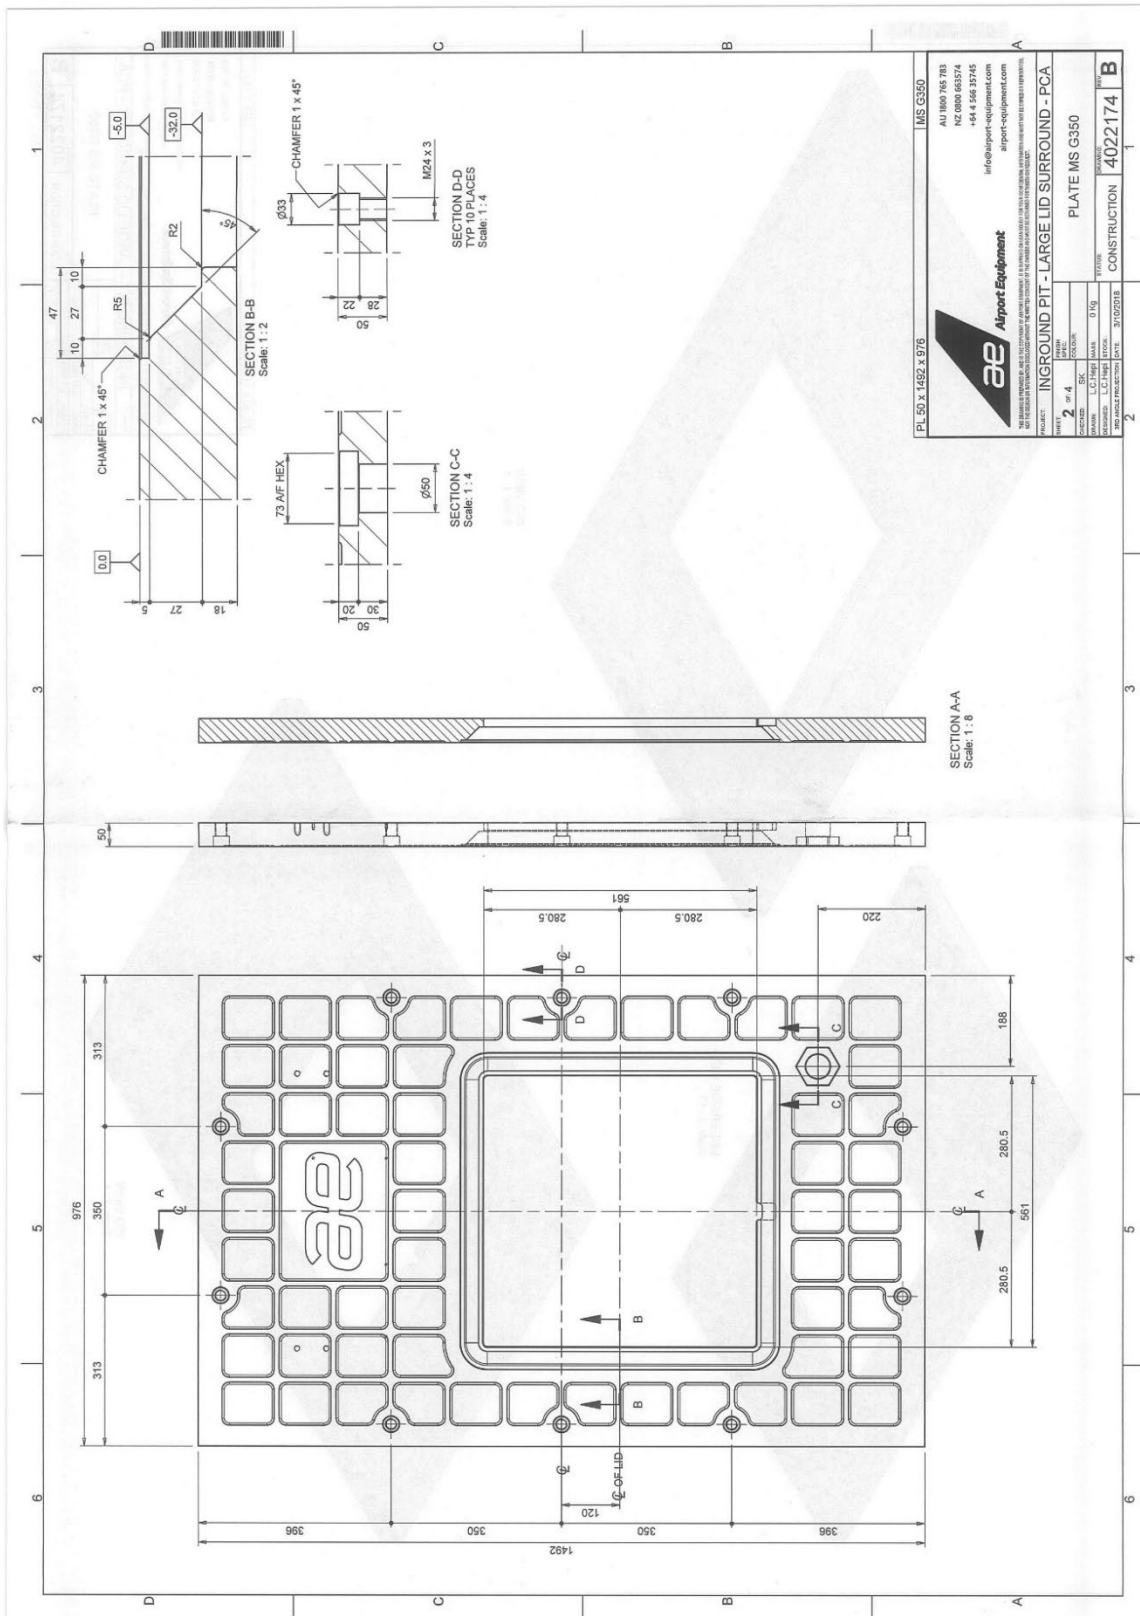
Pit lid (Drawing number 4022174 Sheet 1 of 4) (Drawing supplied by the client)
